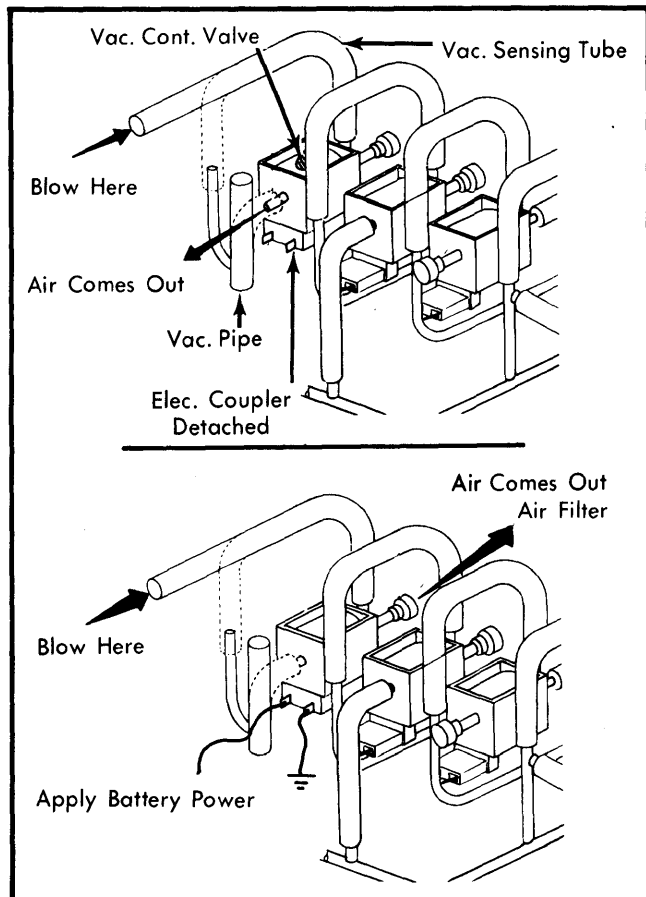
Testing Vacuum Control Valve (Federal Models Shown)
